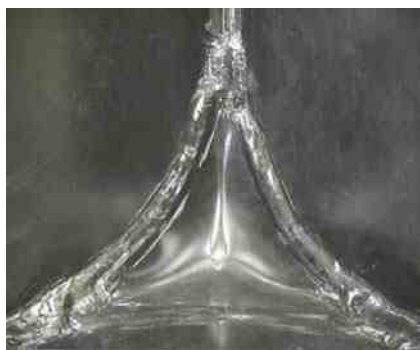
Welded insert (patent applied for) provides stronger corners.
